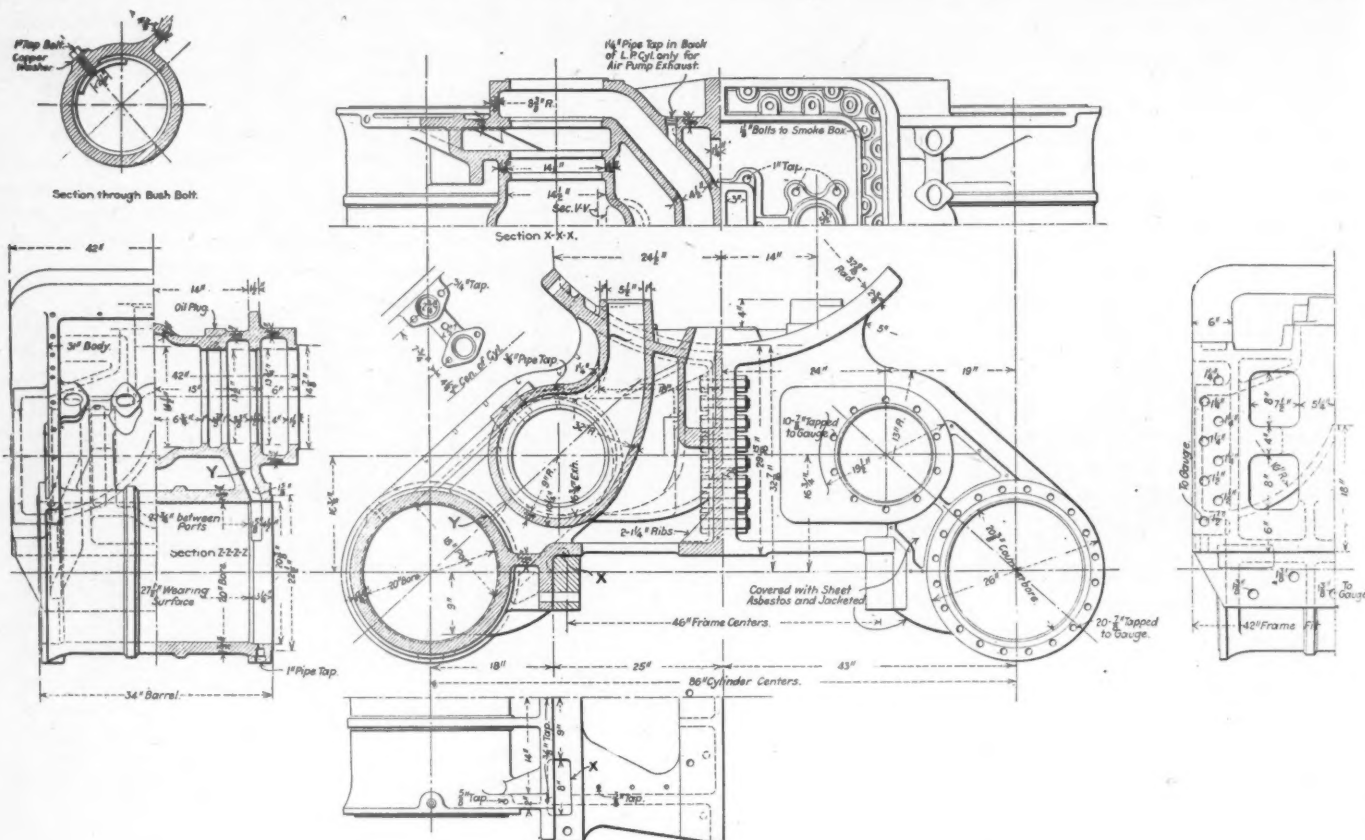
20 BY 24 IN. PISTON VALVE CYLINDER FOR CONSOLIDATION LOCOMOTIVE.
